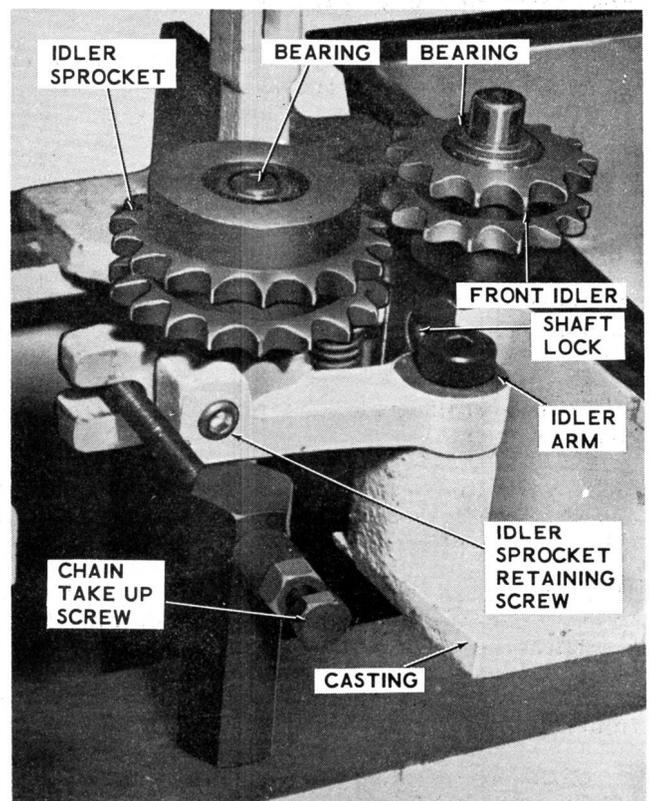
Replacing Conveyor Chain Takeup and Front Idler Bearings
